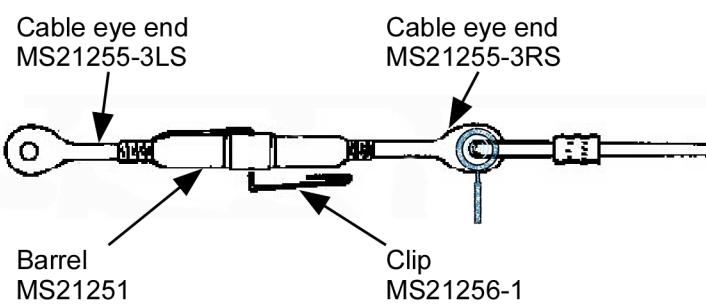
I.10 Attaching the turnbuckles to the cable
